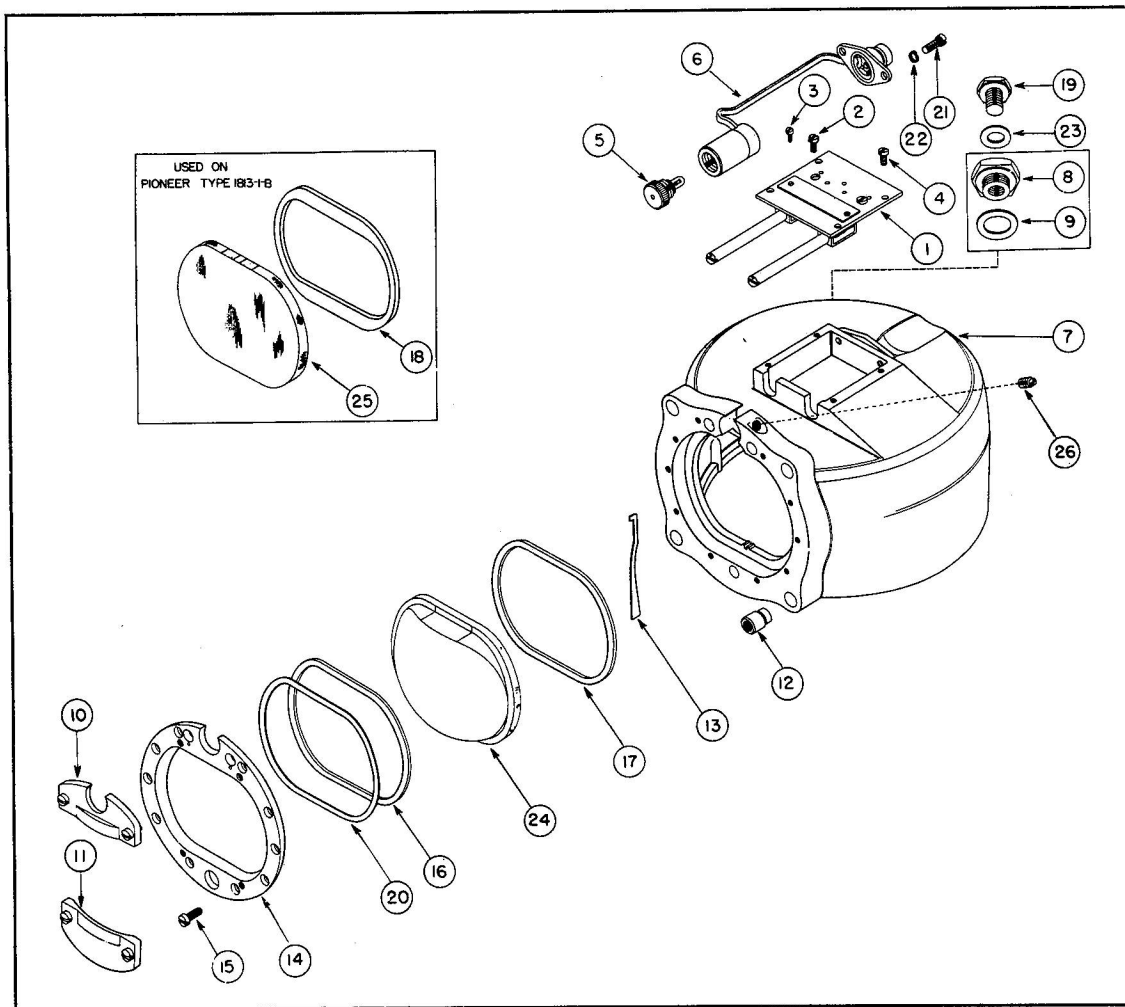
Exploded View - Compass - Type B-17 (Pioneer Types 1813-1-A and 1813-1-B)
